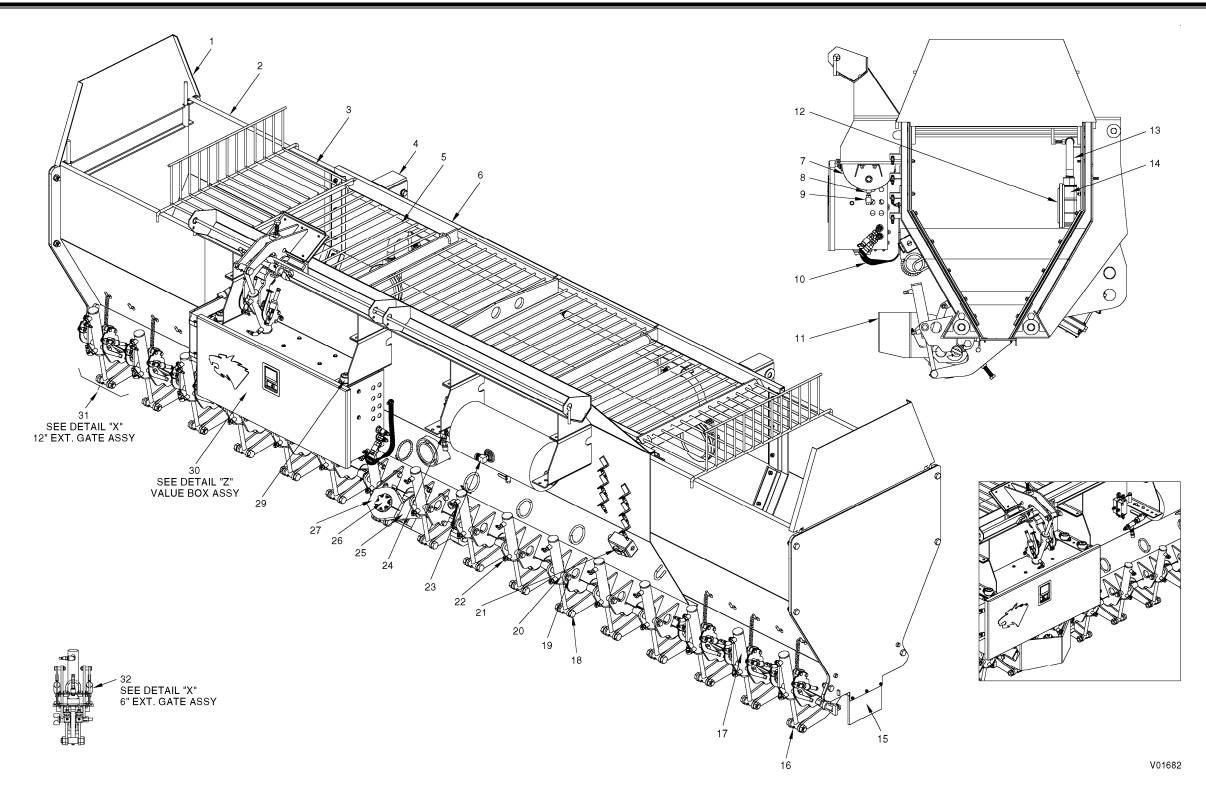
(Sheet 1). Chip Box 6 in. Mouth
